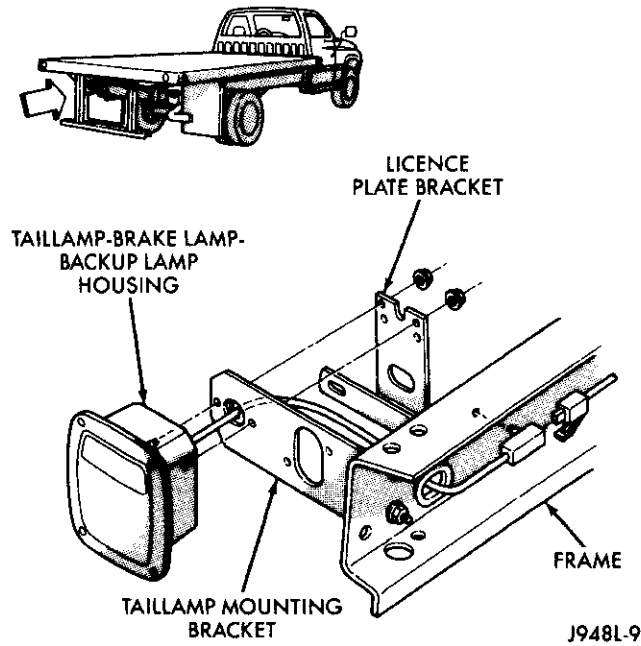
Tail, Stop, Turn Signal and Back-up Lamps—Cab Chassis
